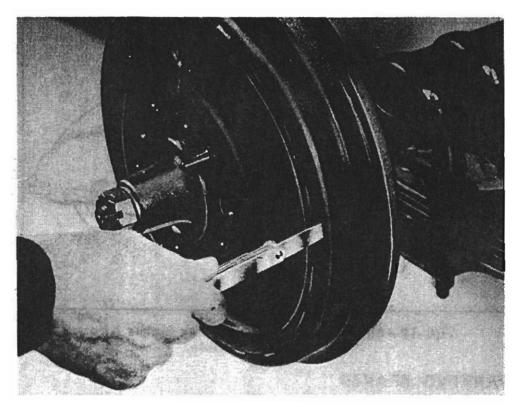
Inserting a .010" Feeler Between the Drum and the Lining as a Final Check.
